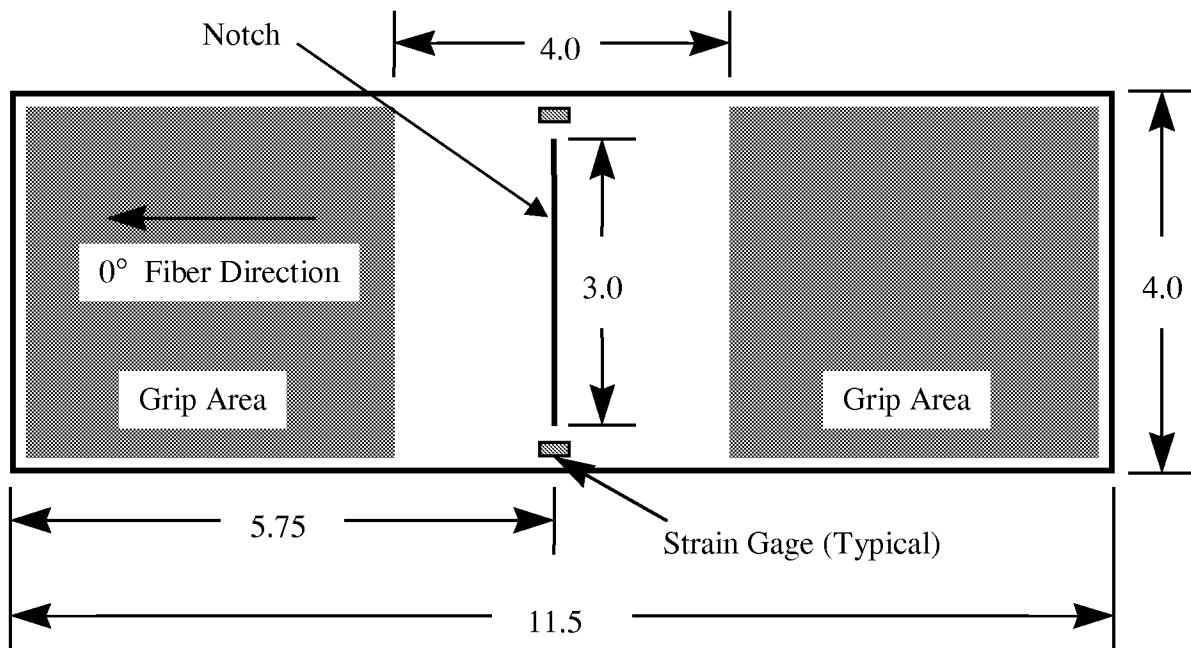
Center notch tension specimen geometry (Dimensions in inches).
